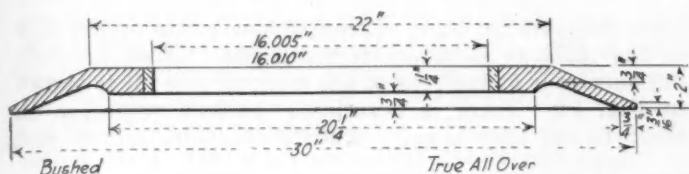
CROSS-SECTION OF THE GRINDING WHEEL
